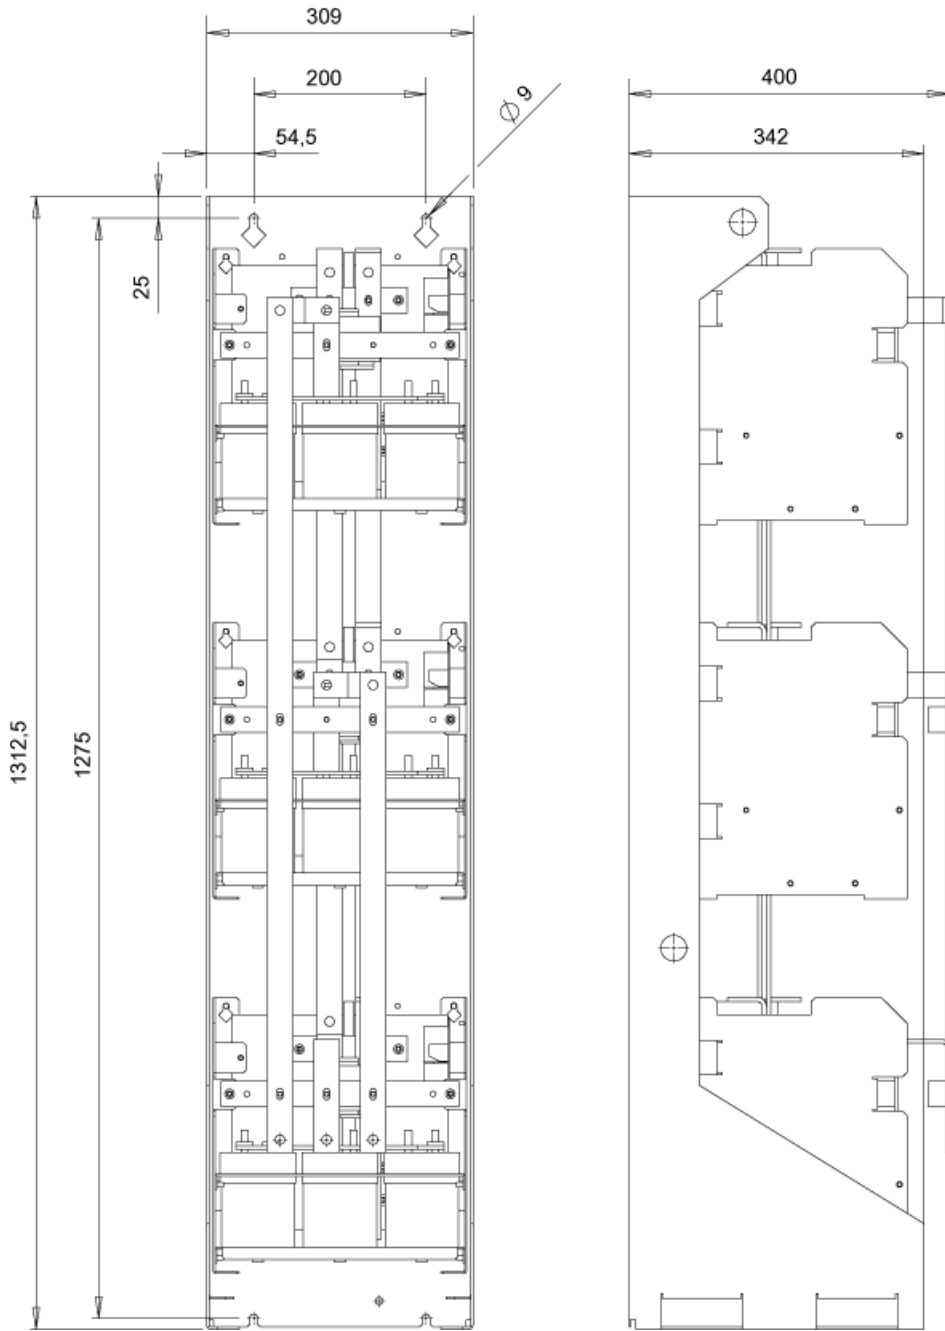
Dimension drawing of the Voltage Peak Limiter, type 3
